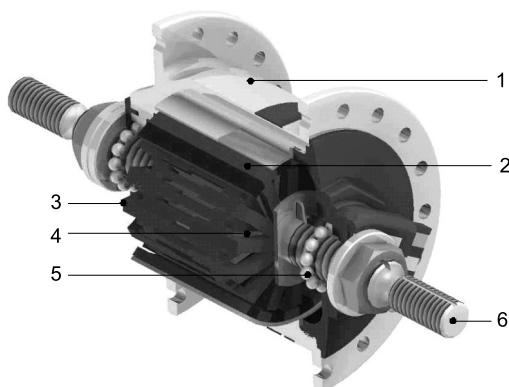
Structure of the DH-3N30 generator: 1 – rotor, 2 – magnet, 3 – frame, 4 – coil, 5 – bearing, 6 – shaft
